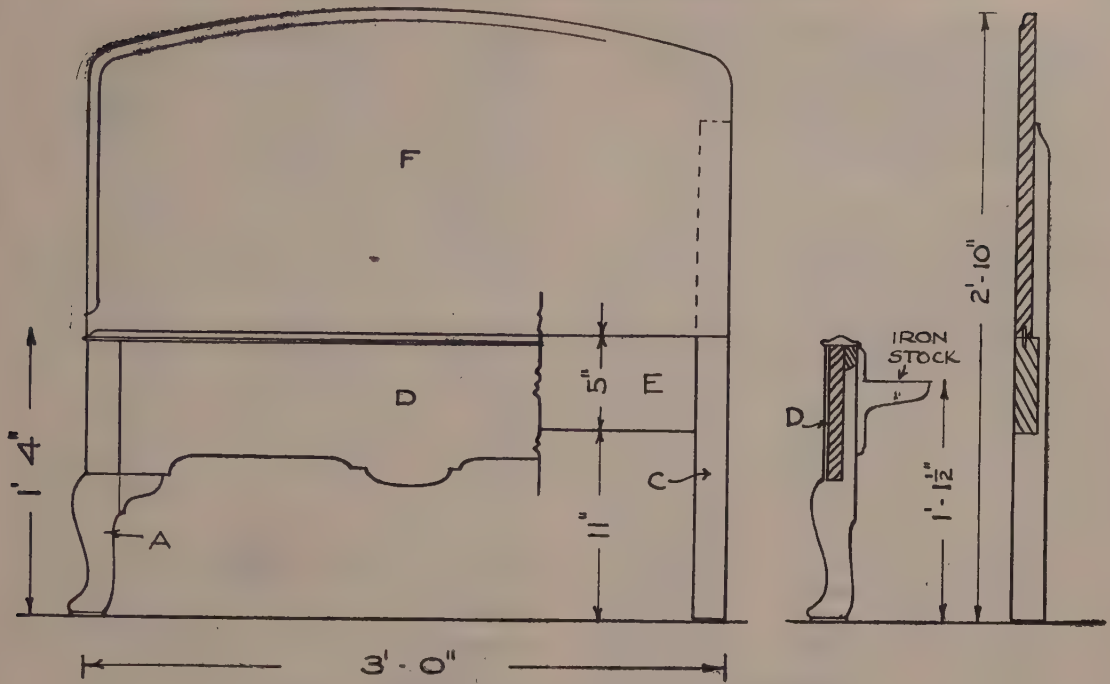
ELEVATION AND SECTION OF 3 FT. BEDSTEAD.
